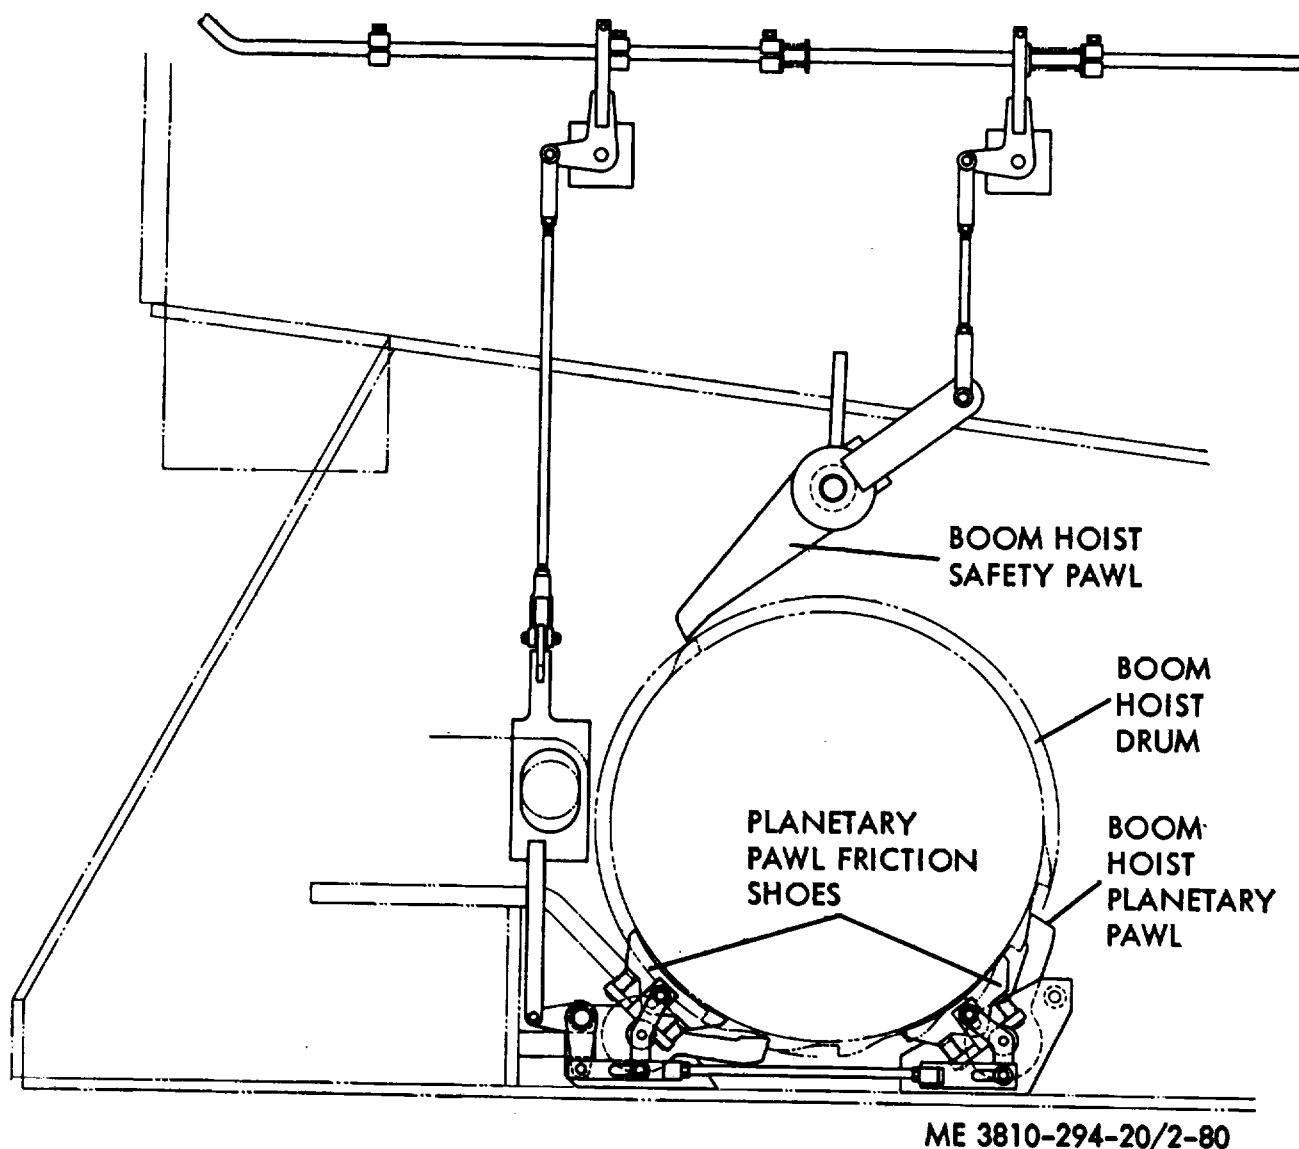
Automatic planetary boom hoist pawls assembly.
